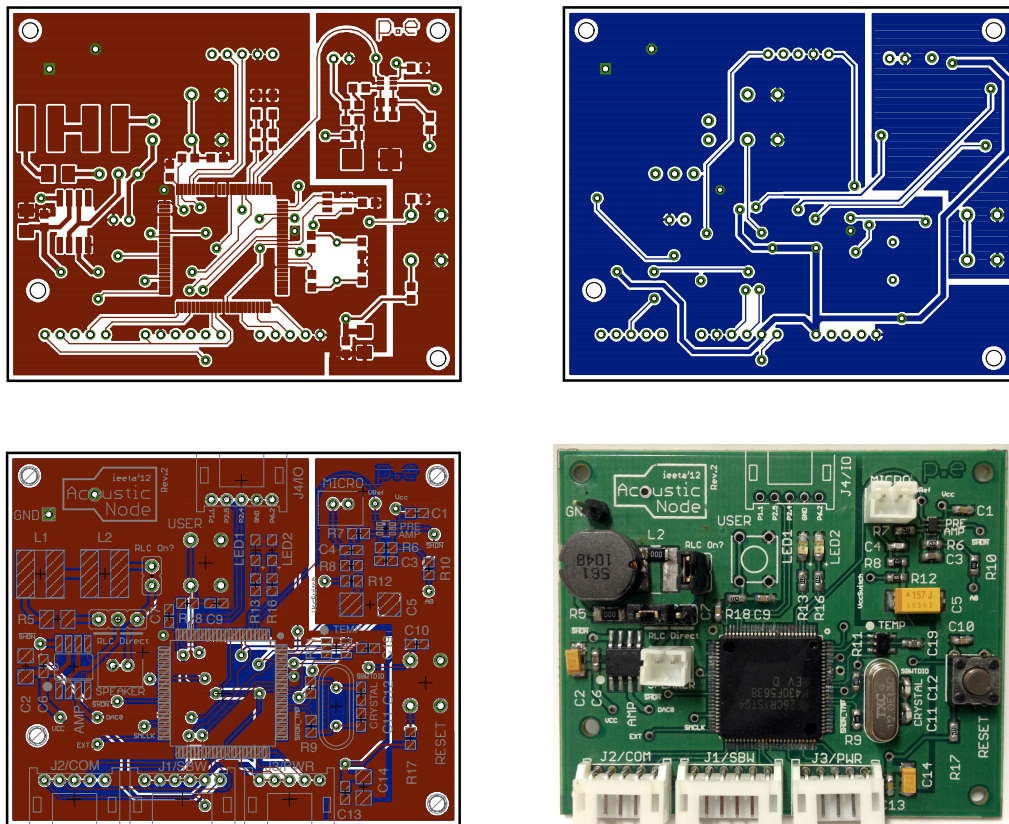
Acoustic beacon PCB design. Top view, Bottom view, component view and assembled PCB.
